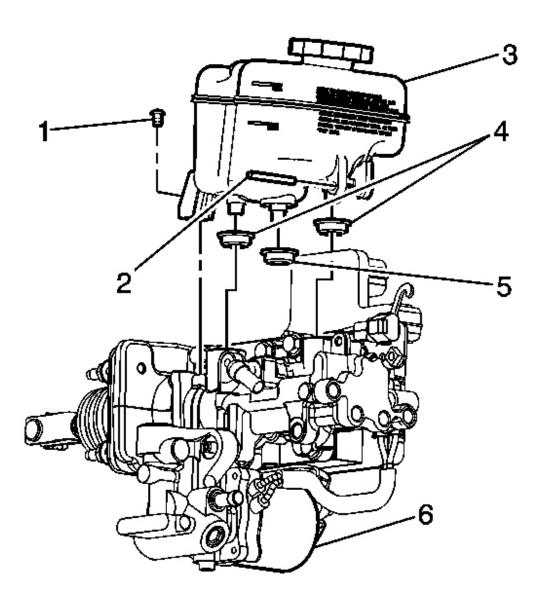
Identifying Master Cylinder Reservoir Courtesy of GENERAL MOTORS CORP.
